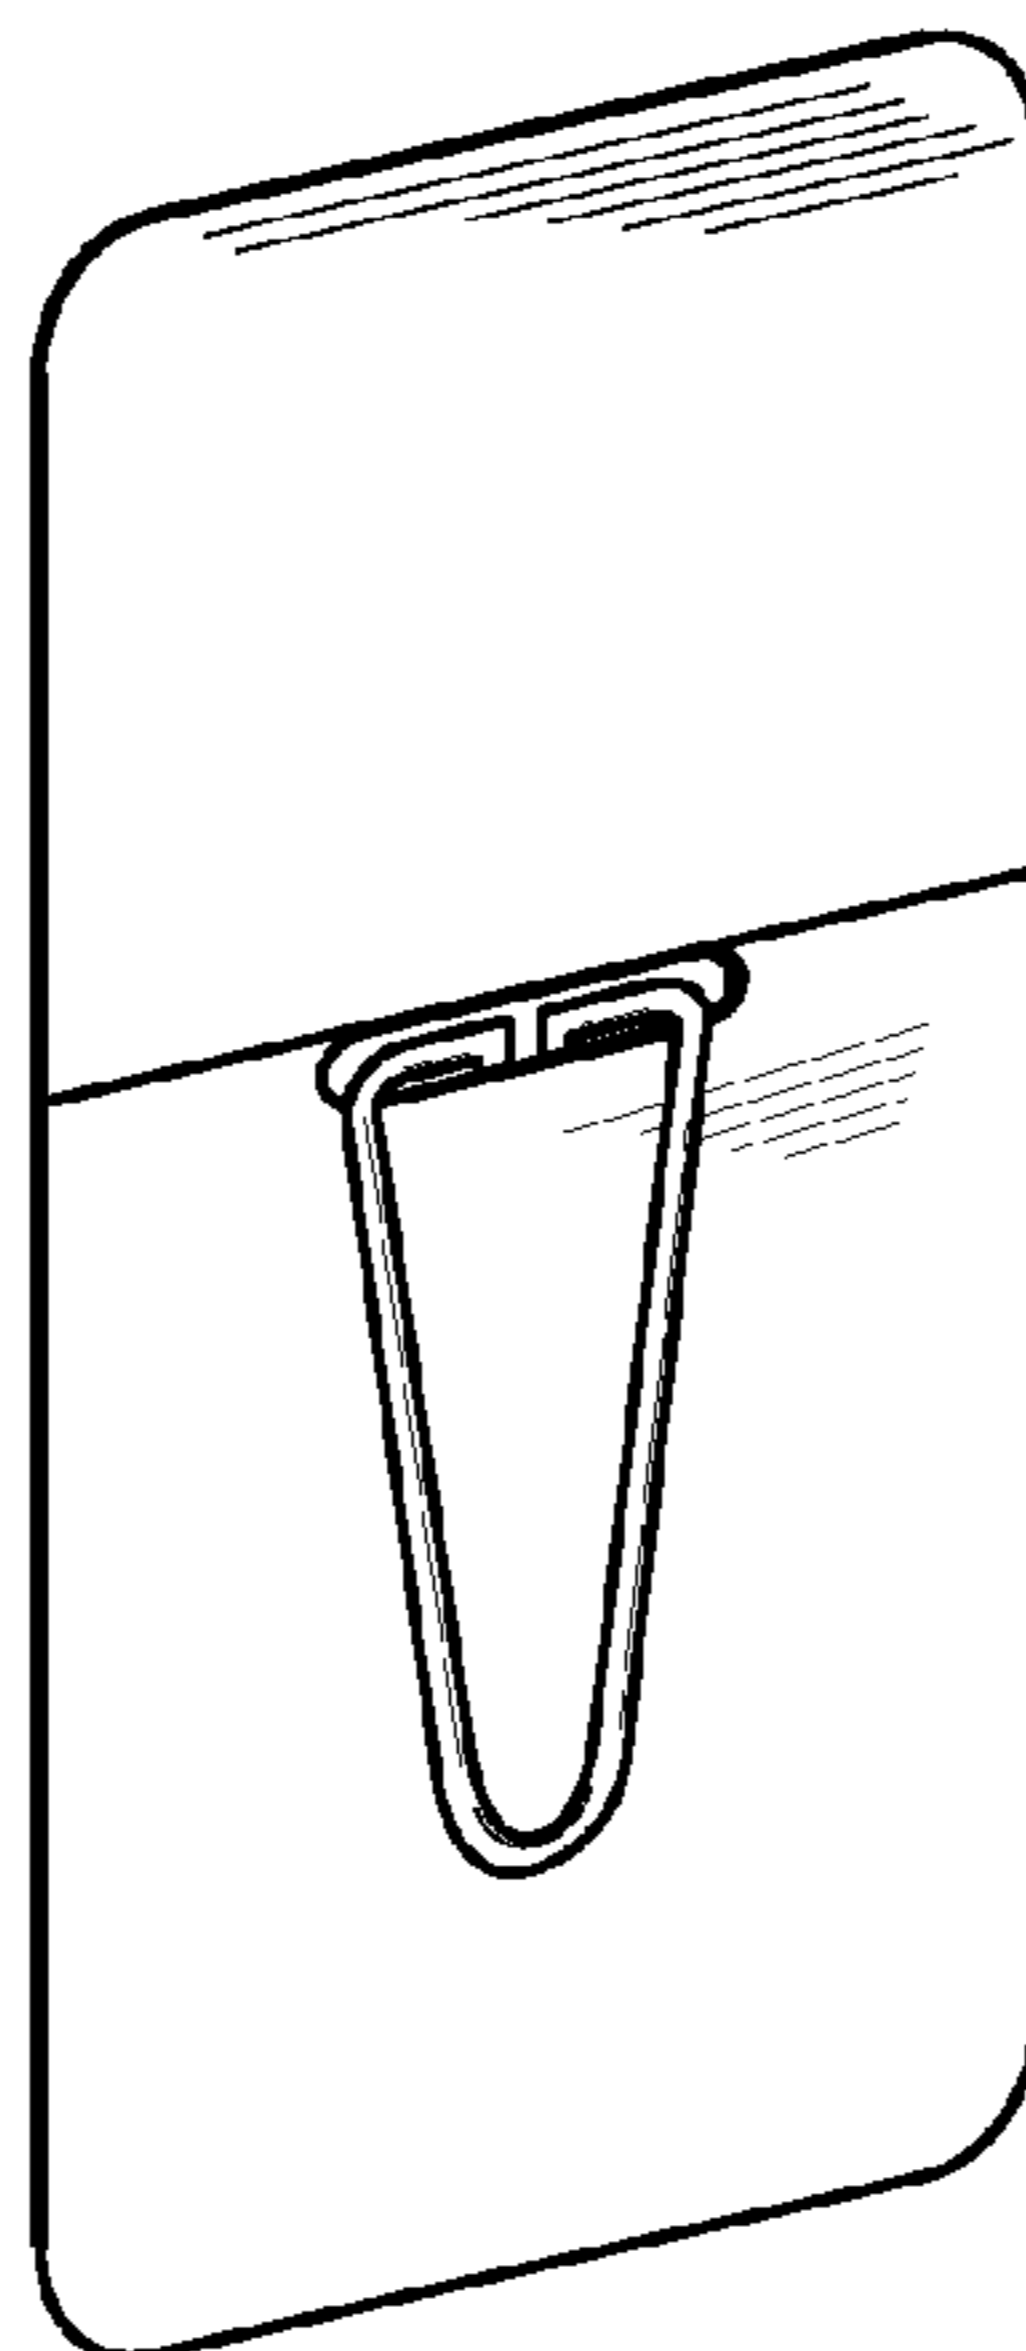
shows a right-side view of the third embodiment. A left-side view of this embodiment is a mirror image of this figure.
